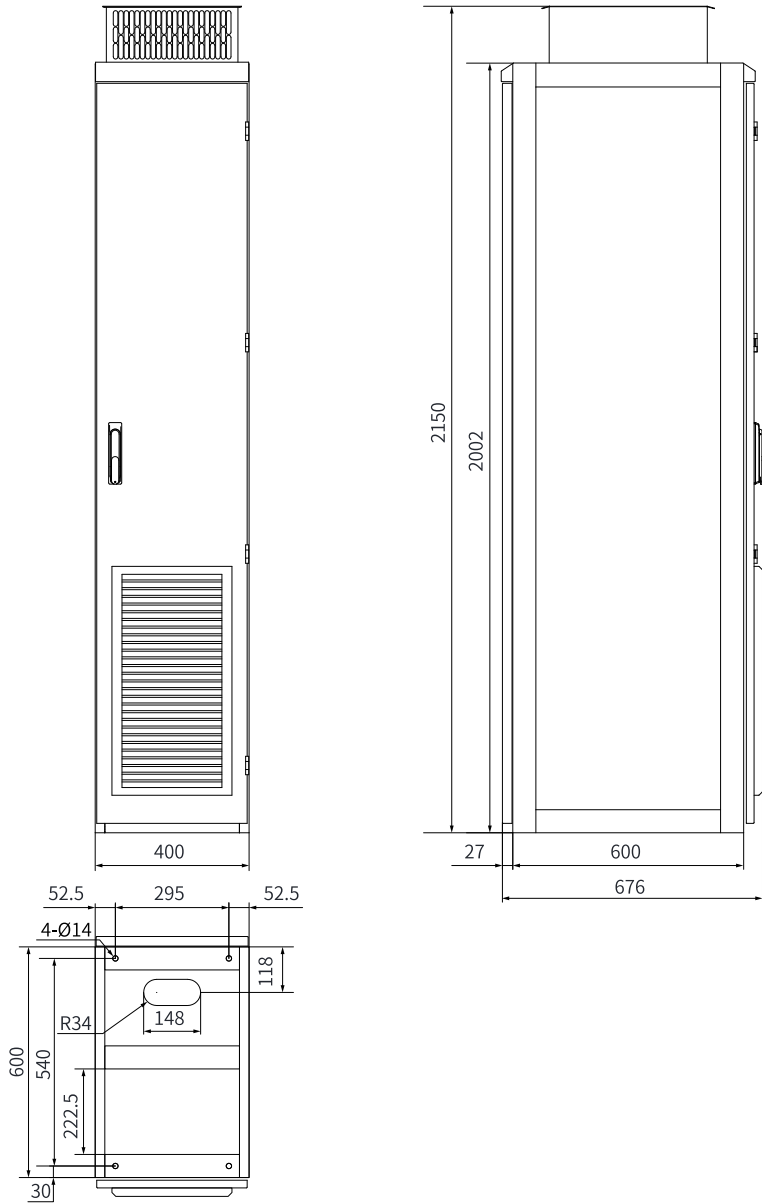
400-mm wide H8 drive cabinet (mm)
